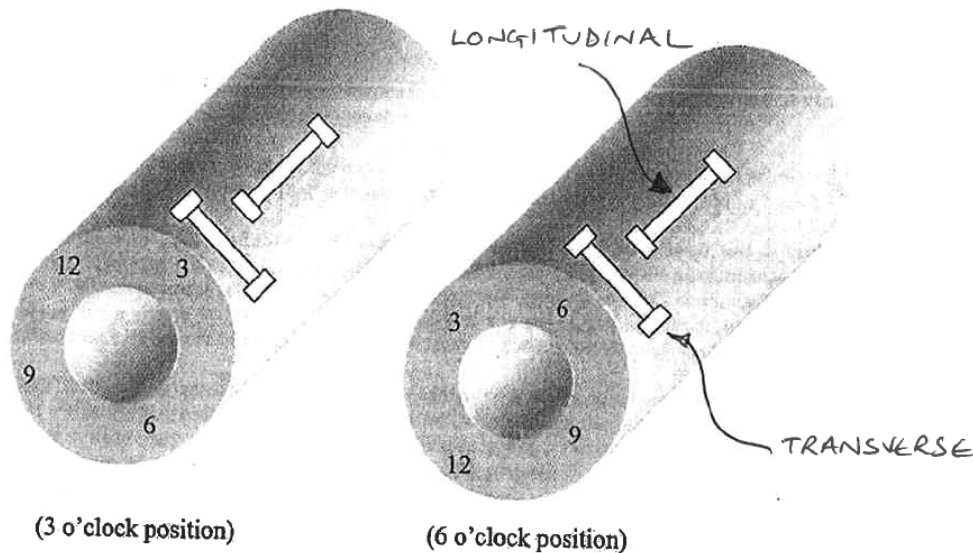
Location of specimen extraction from 3 and 6 o'clock positions (weld seam at 12 o'clock position).
